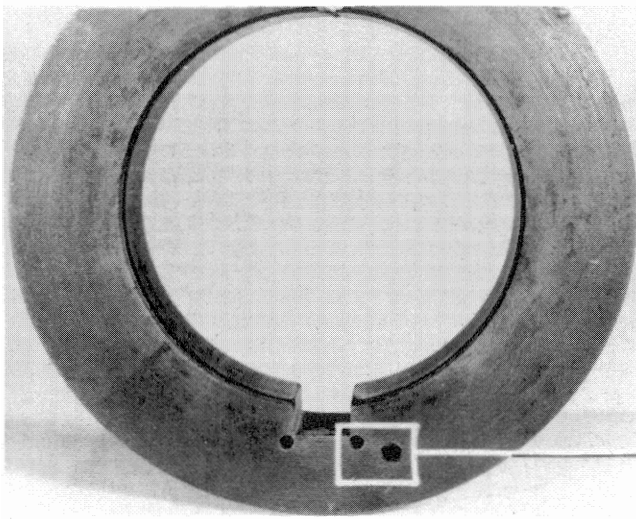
Section of Turbine Hub Cracked by Fatigue at Keyway Corners. The drilled holes are intended to prevent the propagation of the cracks.
